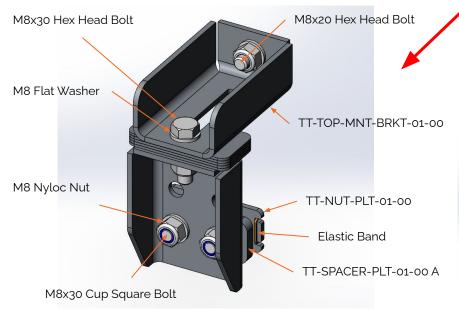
Isometric View of Tacome Bracket Kit Assembly
